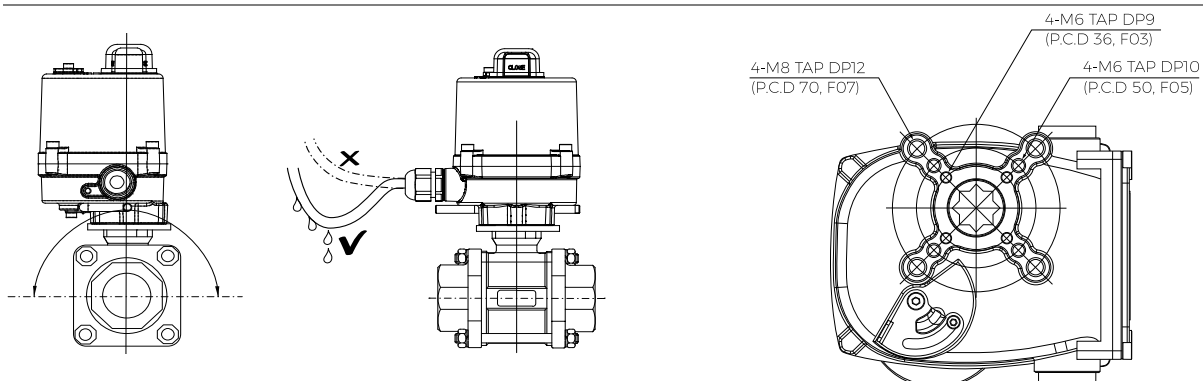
Mounting angle actuator and ISO 5211 mounting flange.
